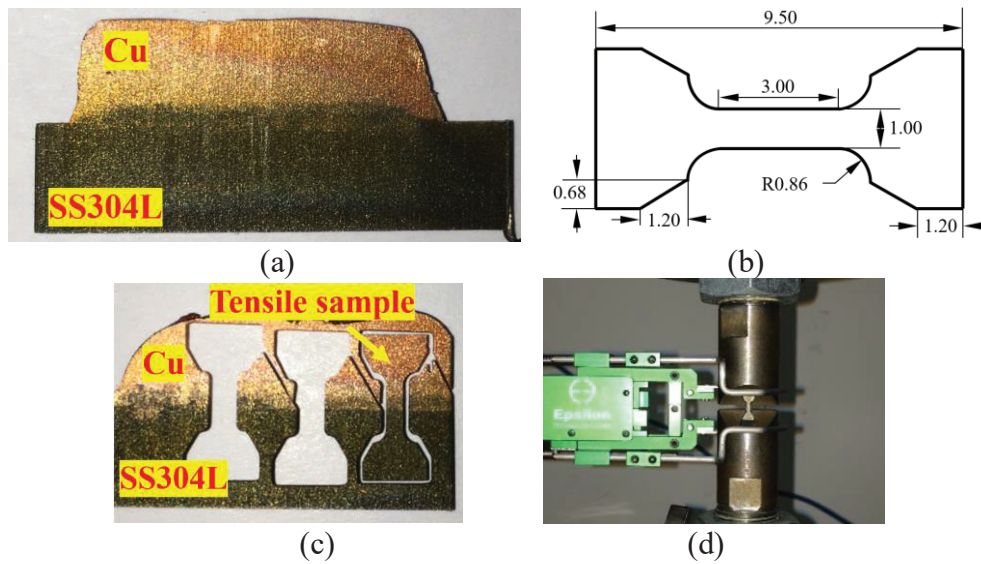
Specimen preparation for tensile testing. (a) Slices of the as-fabricated samples; (b) Tensile specimen dimensions (all dimensions in mm, 1 mm thickness); (c) Tensile samples made of copper and SS304L; (d) Tensile testing setup
